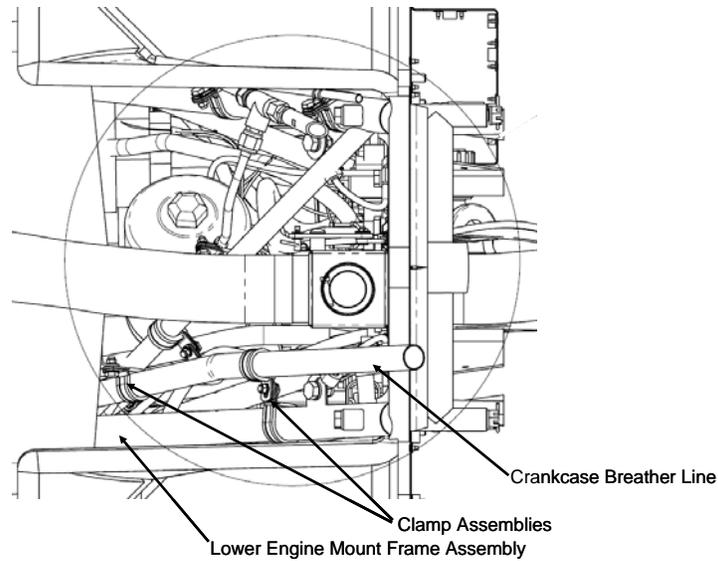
Crankcase Direct Breather Line Clamp Removal
